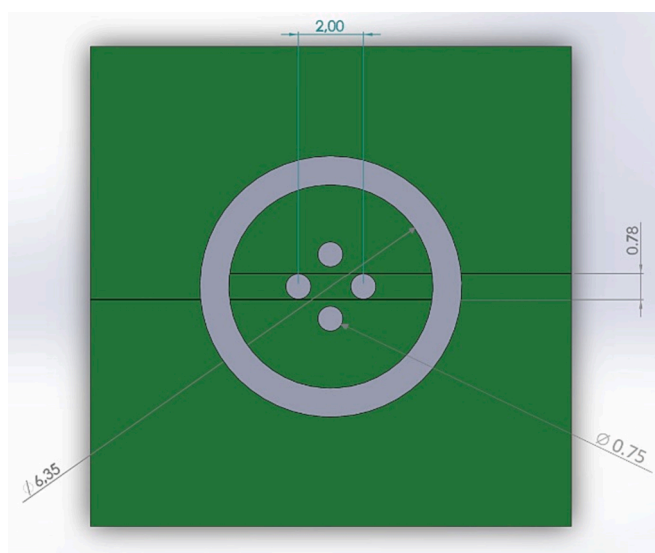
Top view of 3D model of the experimental setup (dimensions in mm).
